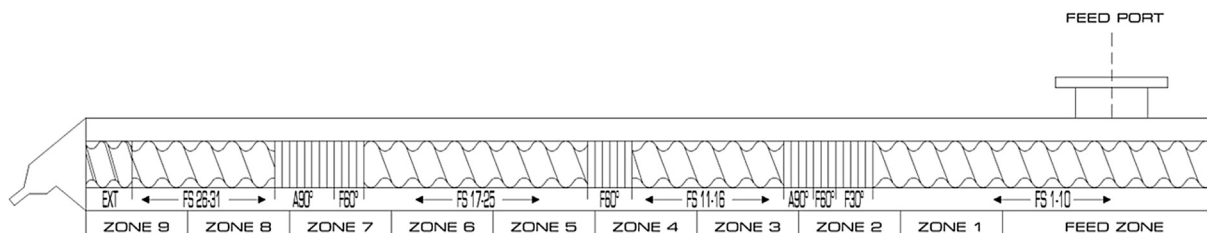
Screw profile scheme of co-rotating intermeshing twin-screw extruder (L/D = 40, D = 16 mm).
